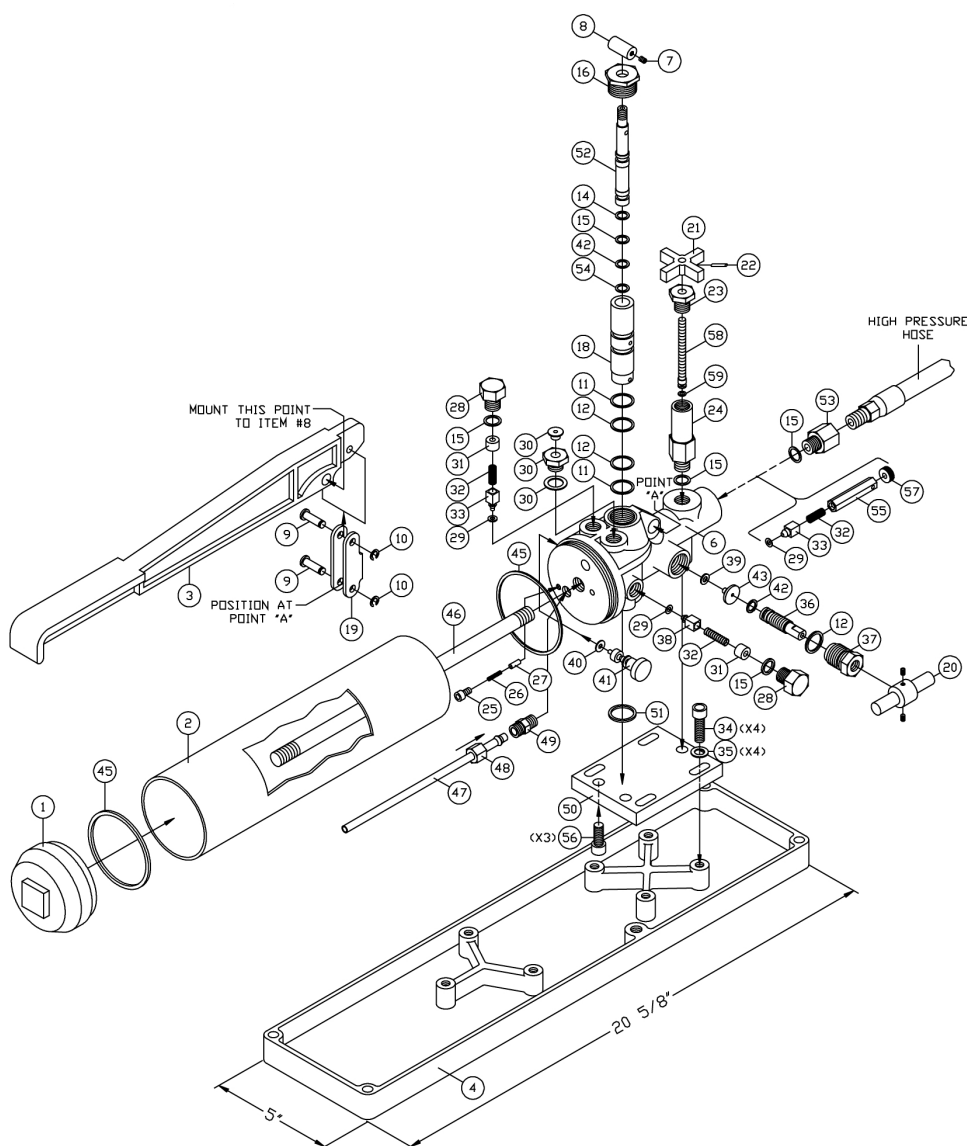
Hand Pump Assembly (Drawing 214000A-01)
